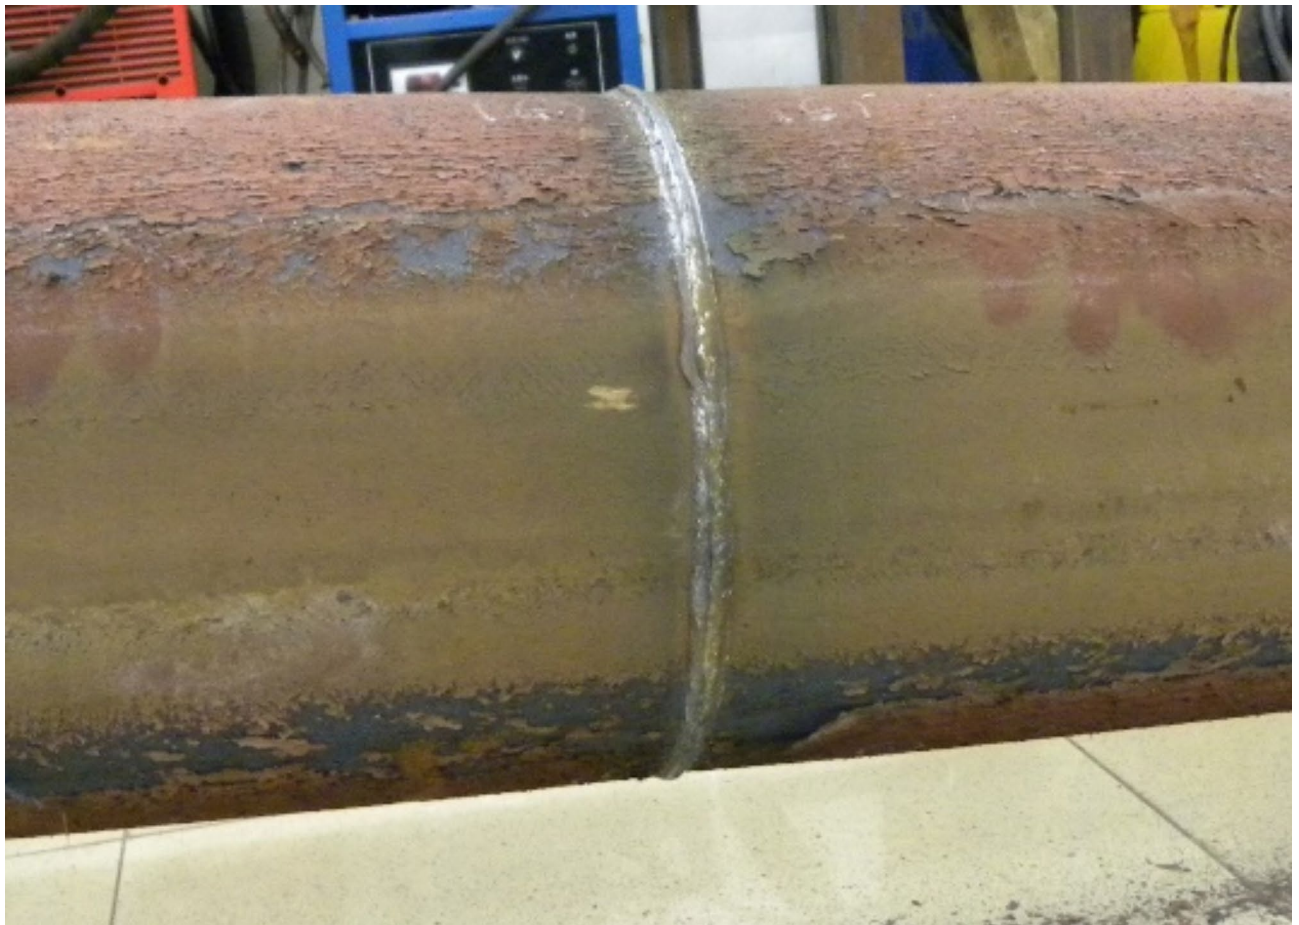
Fully expanded state of welding seam on ECP.
